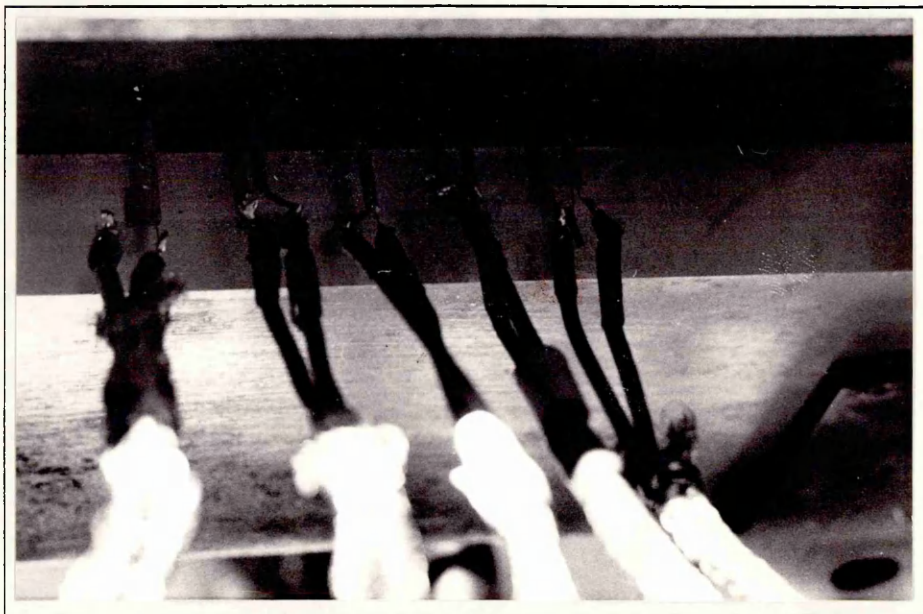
Five thermocouples attached to a plate to be welded.
